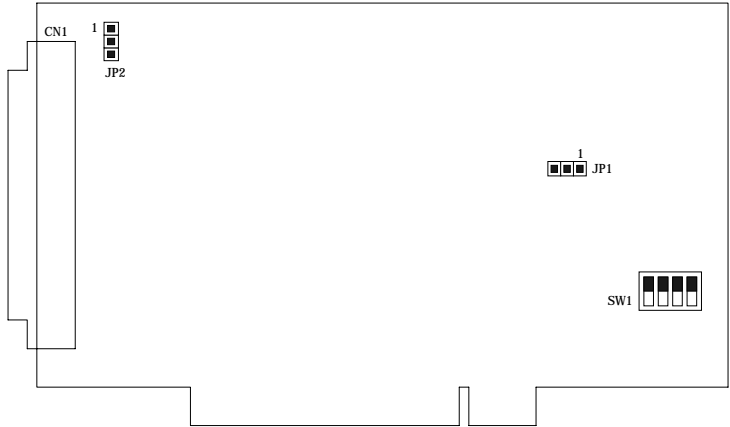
Location of Jumpers and DIP switch on PCI-1756
